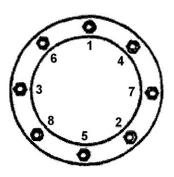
Torquing sequence for circular eight-bolt flange.
